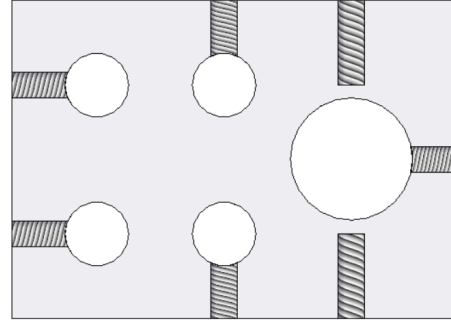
Central cut view of the stand. Threaded holes for the tightening M3 screws
